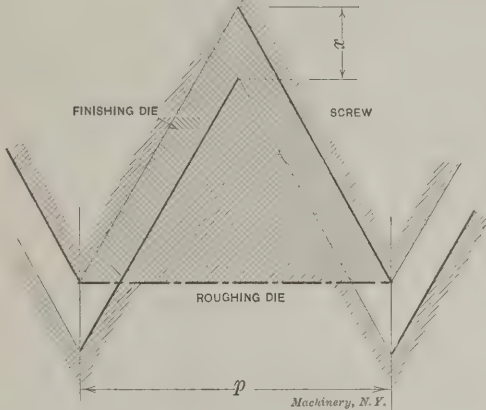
Diagram of Metal Removed, Standard Sharp V Thread.
